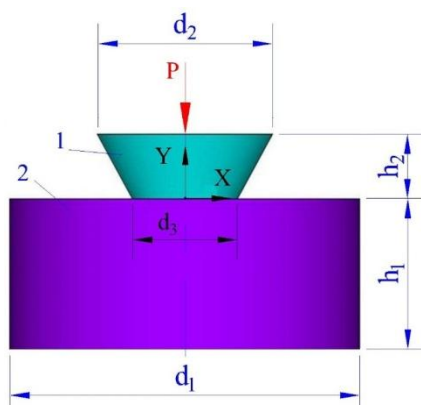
Particle and workpiece model: 1 is abrasive particle; 2 is workpiece
